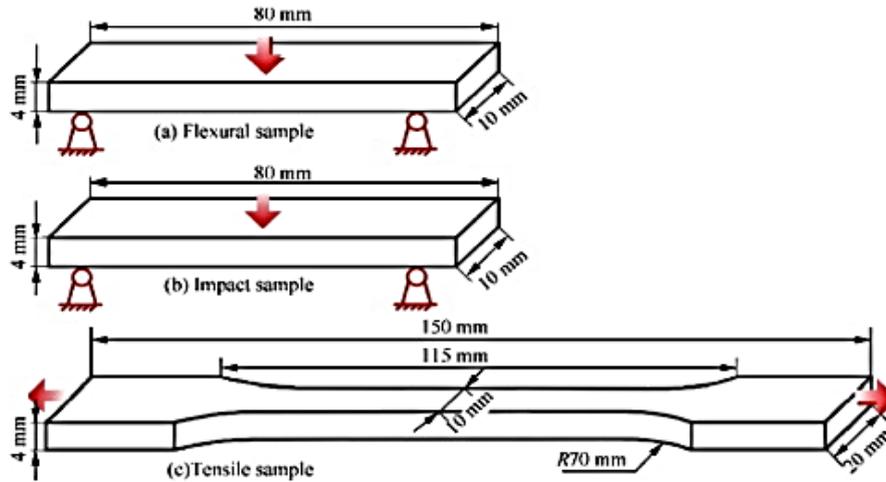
Dimensions and load case of FDM-3D Printed Samples.
